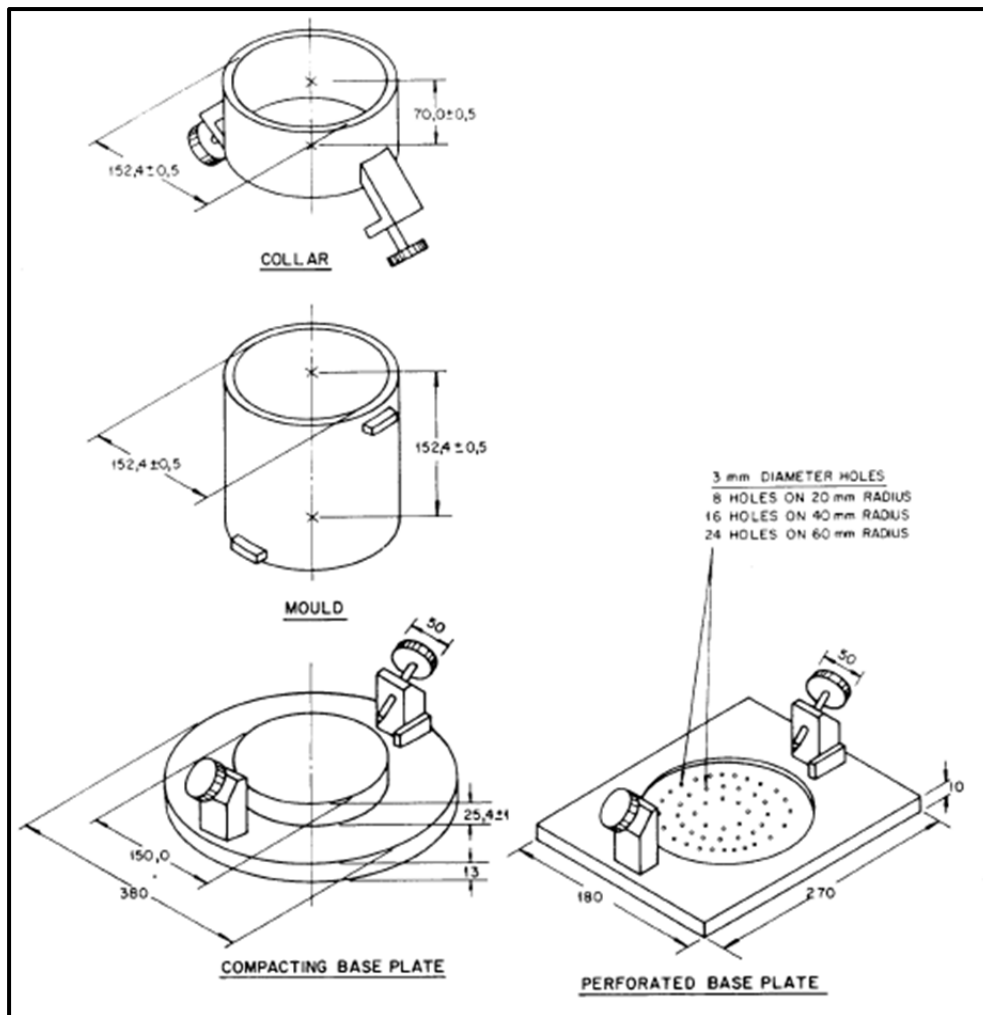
Mould with collar and base plates, adapted from (TMH1-A7, 1986)
